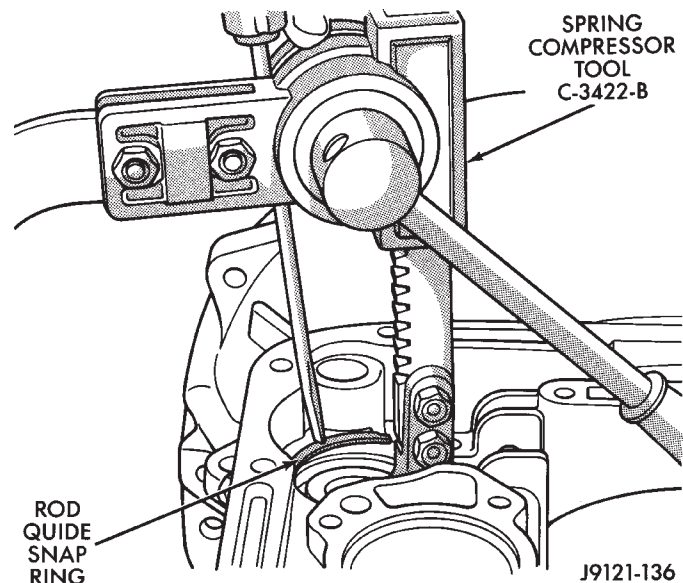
Compressing Front/Rear Servo Springs side. Be sure this side of cam faces rearward (toward piston retainer).
